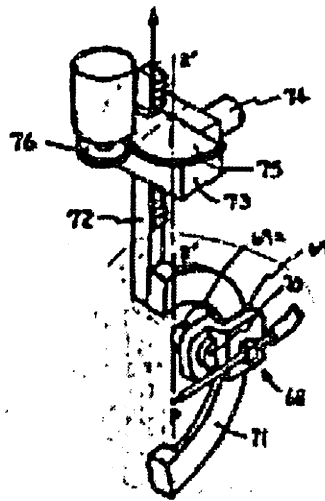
Isometric view of the DLP machine's first design embodiment.
